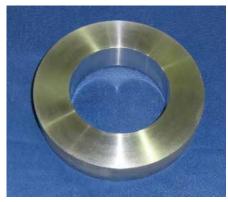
Photograph of a steel ring showing that had 0.05 inch of NiCr-Cr3C2 deposited by Cold Spray after being machined in a lathe.
